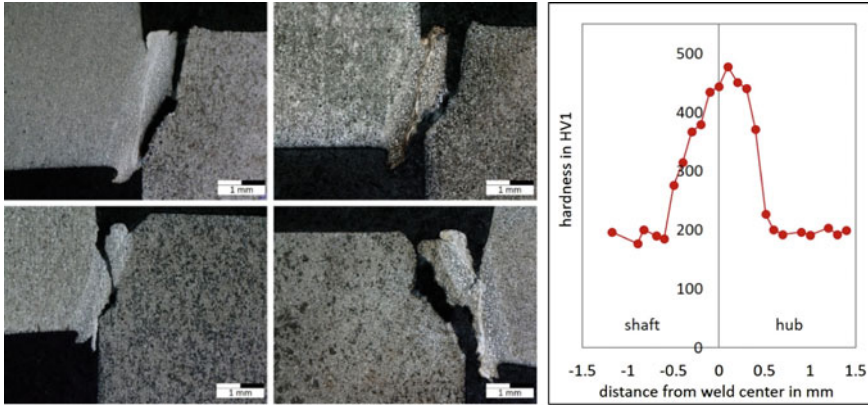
Fracture in the base material after the press-out test (*left*) and hardness measurement through the heat affected zone of the shaft-hub weld (*right*)
